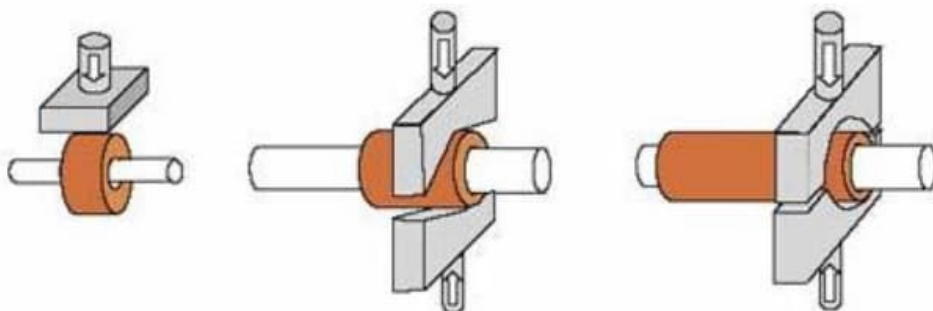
Steps in forging a copper tube: Hammer forging and forging with a mandrel (Nolvi, 2009.)
